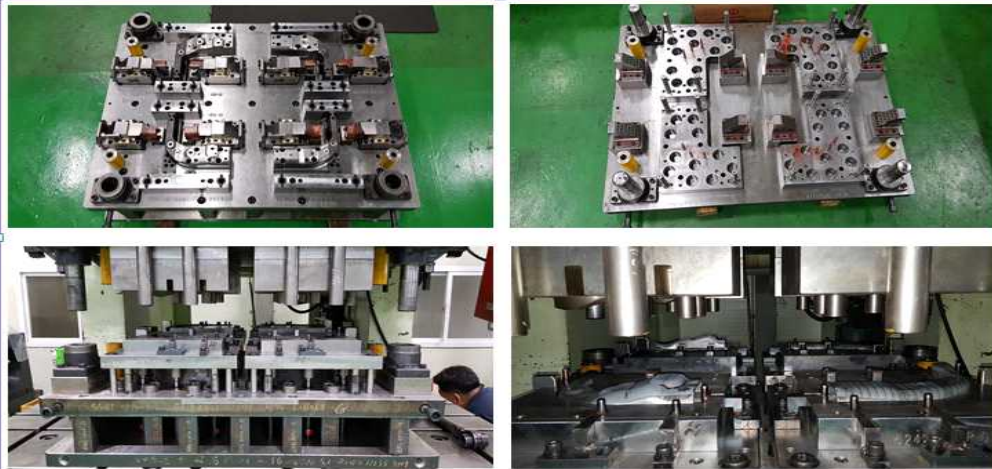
Assembly of press Multi-shape composite mold(1)
